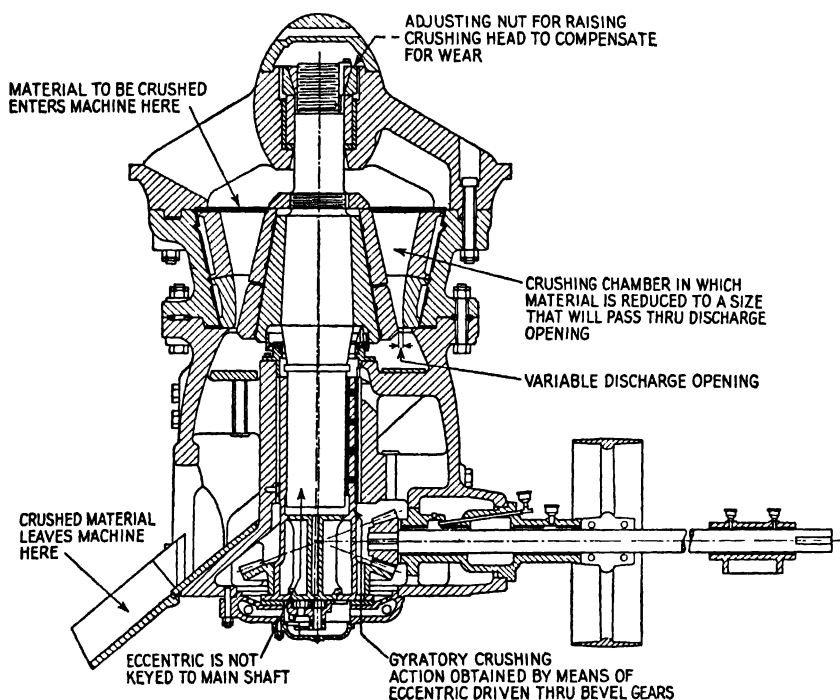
Gyratory Crusher. Courtesy Allis-Chalmers Manufacturing Company, Milwaukee, Wis.
